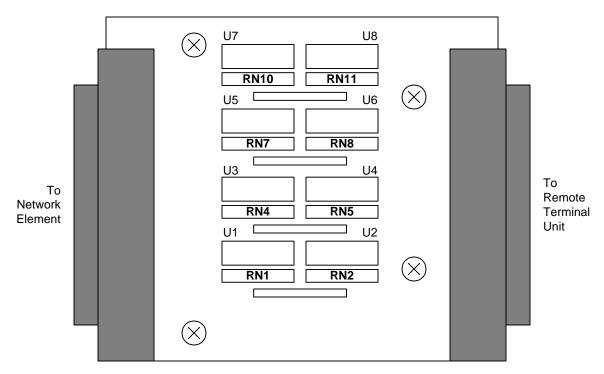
Universal Discrete Adapter Board Layout (Cover Plate Removed)
